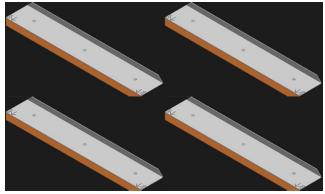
h V-2415-K End Seal Kit for 6" Panel Holders
